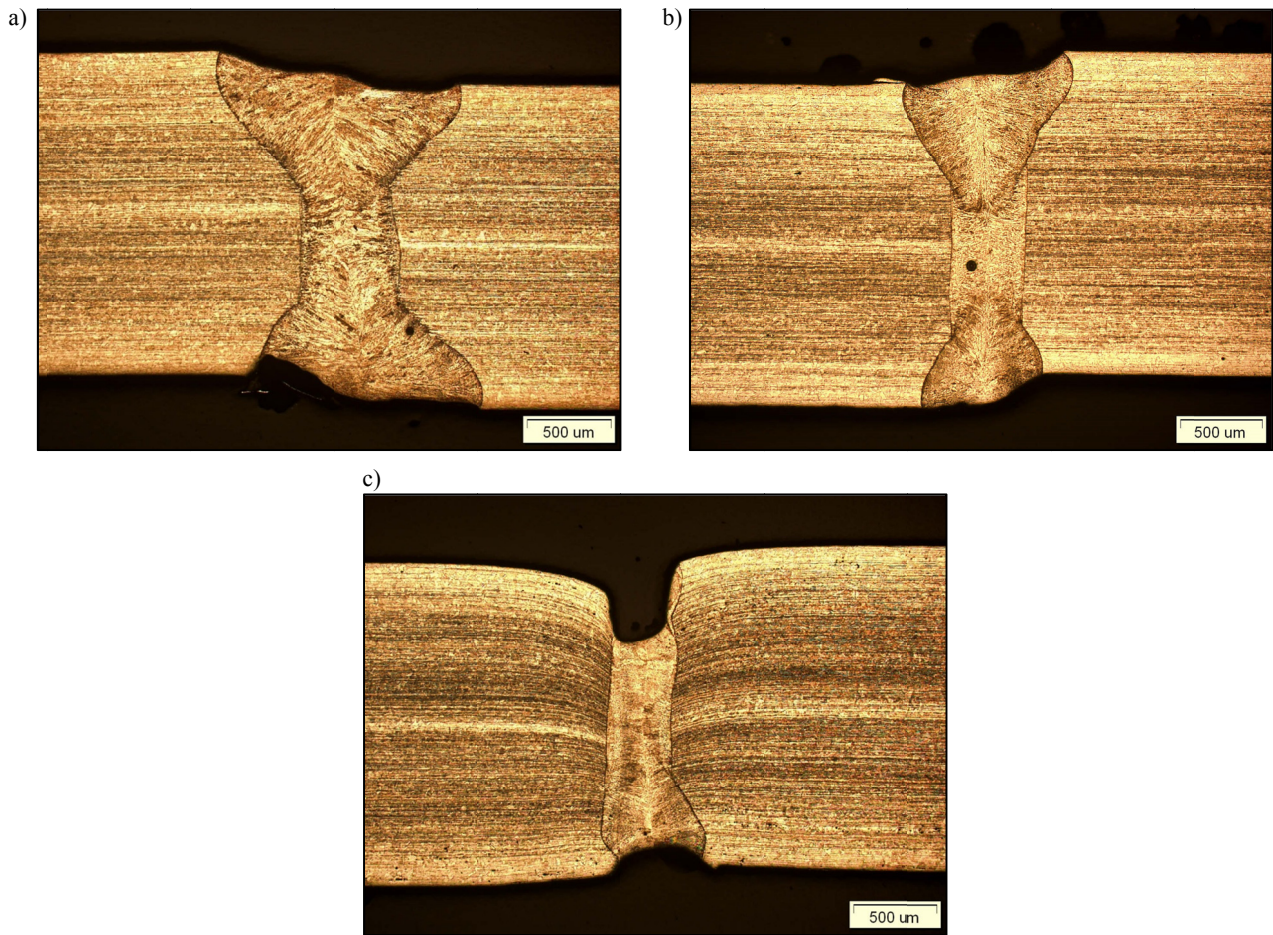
Macrostructure on cross sections of butt joint of AISI 304 steel sheets 2.0 mm thick welded by the disk laser at different energy input (Table 3); a) 30 J/mm (1.0 kW, 2.0 m/min), b) 22.5 J/mm (1.5 kW, 4.0 m/min), c) 20 J/mm (1.0 kW, 3.0 m/min)
